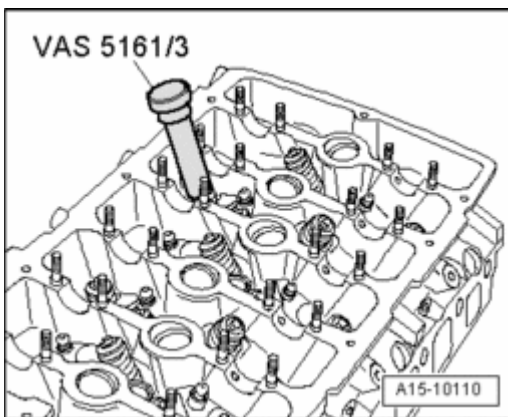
Placing Drift VAS 5161/3 On Valve Plate
